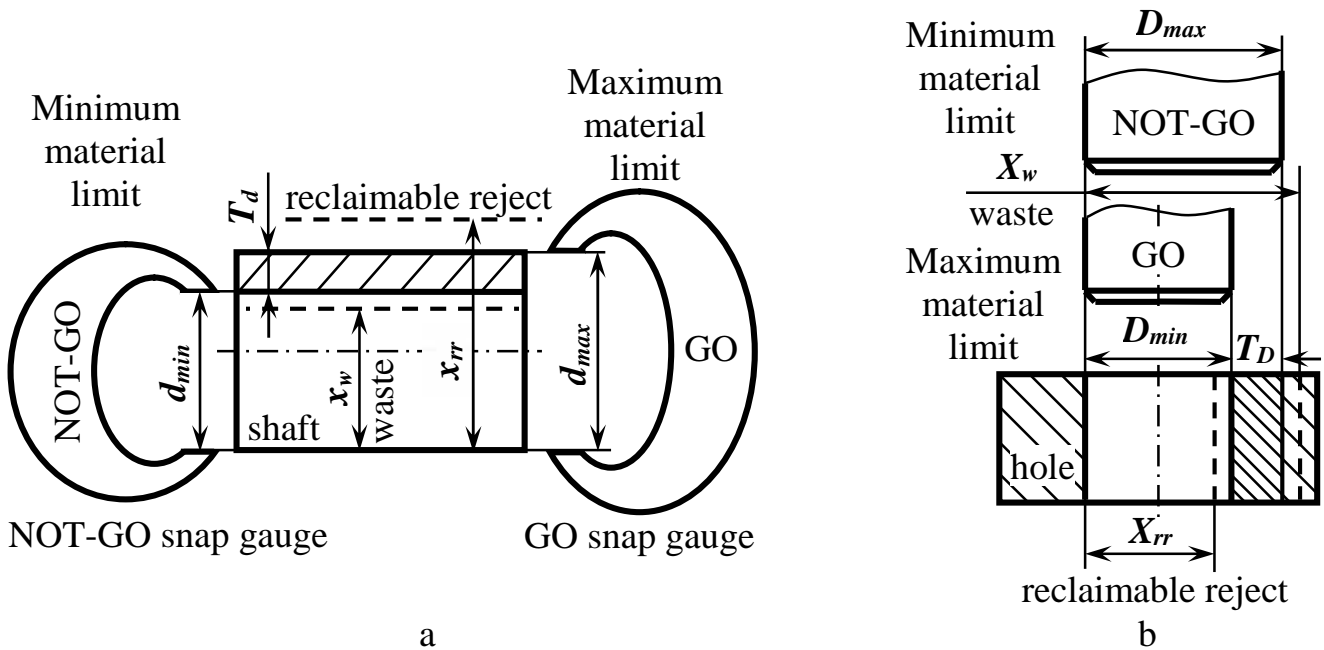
Diagram for check of a shaft with snap gauges (a) and check of a hole with plug gauges (b)
